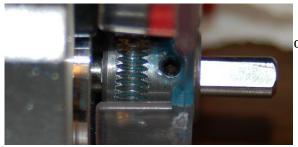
Grub screw installed, mess with thread locker made.
